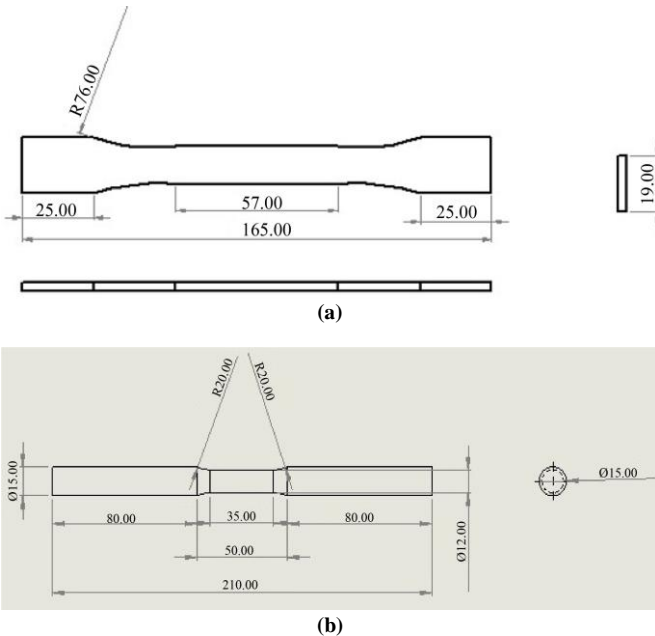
Material Test Sample models (a) Tensile Test Sample (b) Fatigue Test Sample
